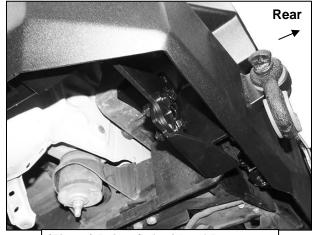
Attach driver/left Mesh Fill Panel or LED cube light to opening in Bumper. Do not install Fill Panels with lights
